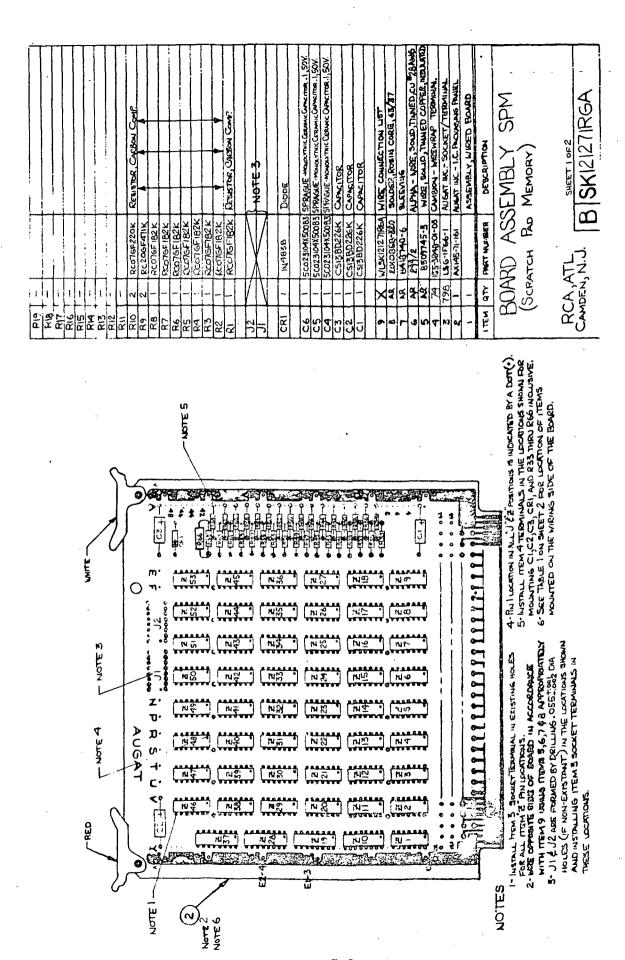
Scratch pad memory plug-in board A8 (sheet 1 of 2)
